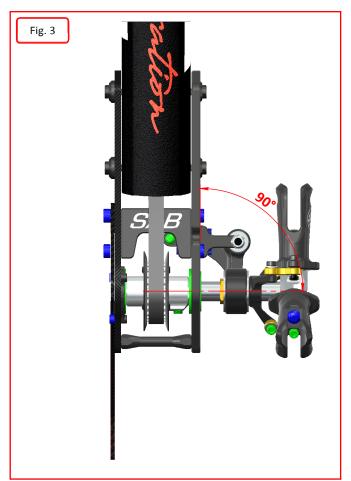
, The tail output shaft must be perpendicular to the boom mid-line.
